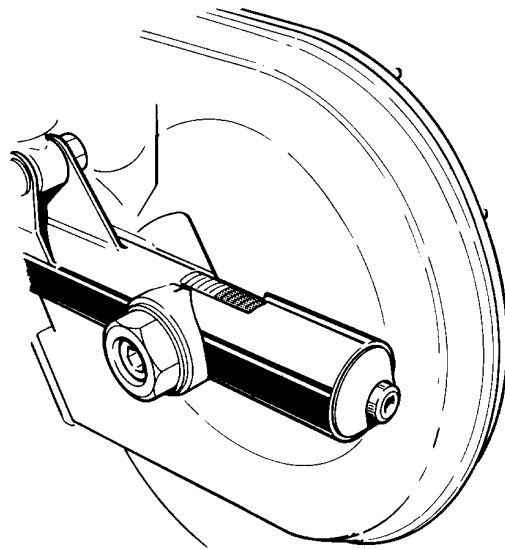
Maintaining the Rear Wheel Spindle Adjustment
